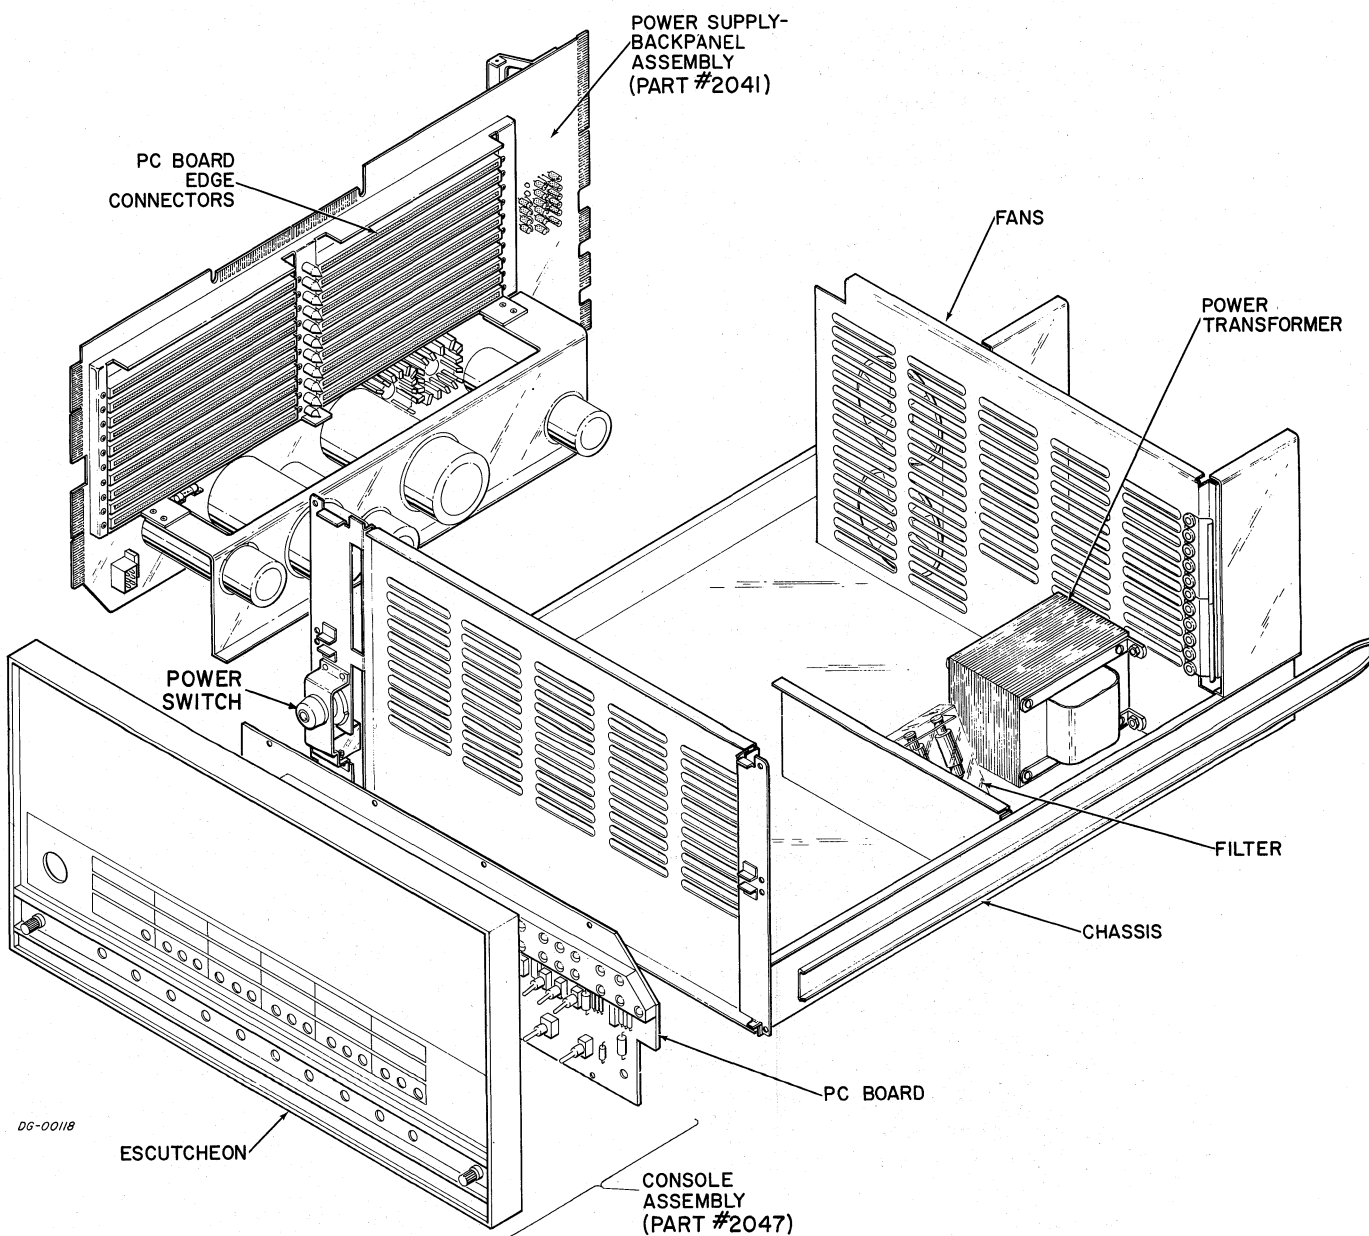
Exploded View of The Nova 1220 Computer With Central Processor and Memory Cards Removed
